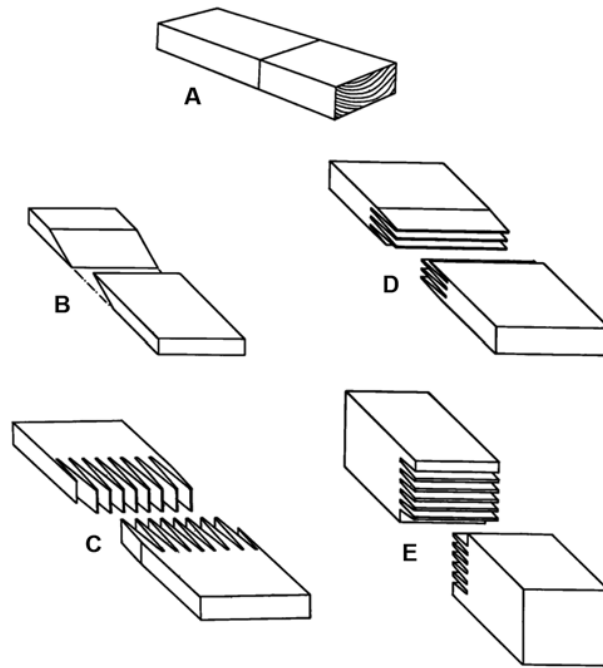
End grain joints for structural and non-structural connections: A, butt joint; B, scarf joint; C, vertical structural fingerjoint; D, horizontal structural fingerjoint; E, non-structural fingerjoint (Frihart & Hunt, 2010).
